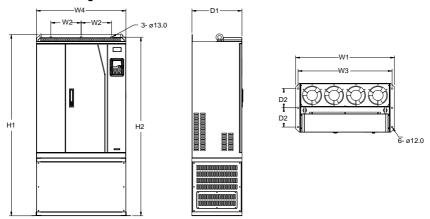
Floor mounting for 380V 220-315kW VFD models
